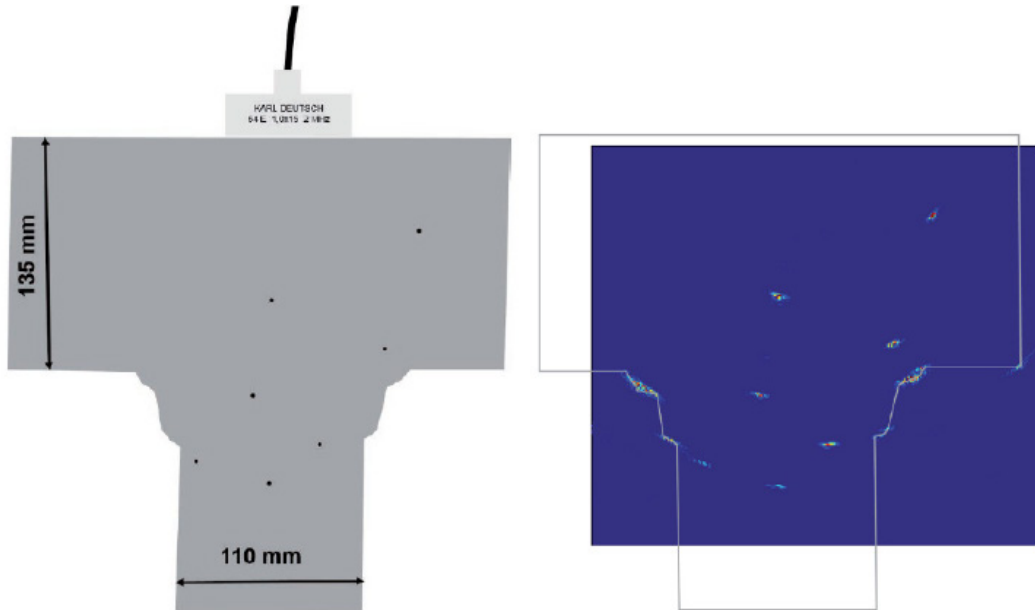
Testing of a thick-walled welded T-joint with TFM, providing space correct images. Not only the 2 mm side drilled holes but also the weld contour are imaged very well.
